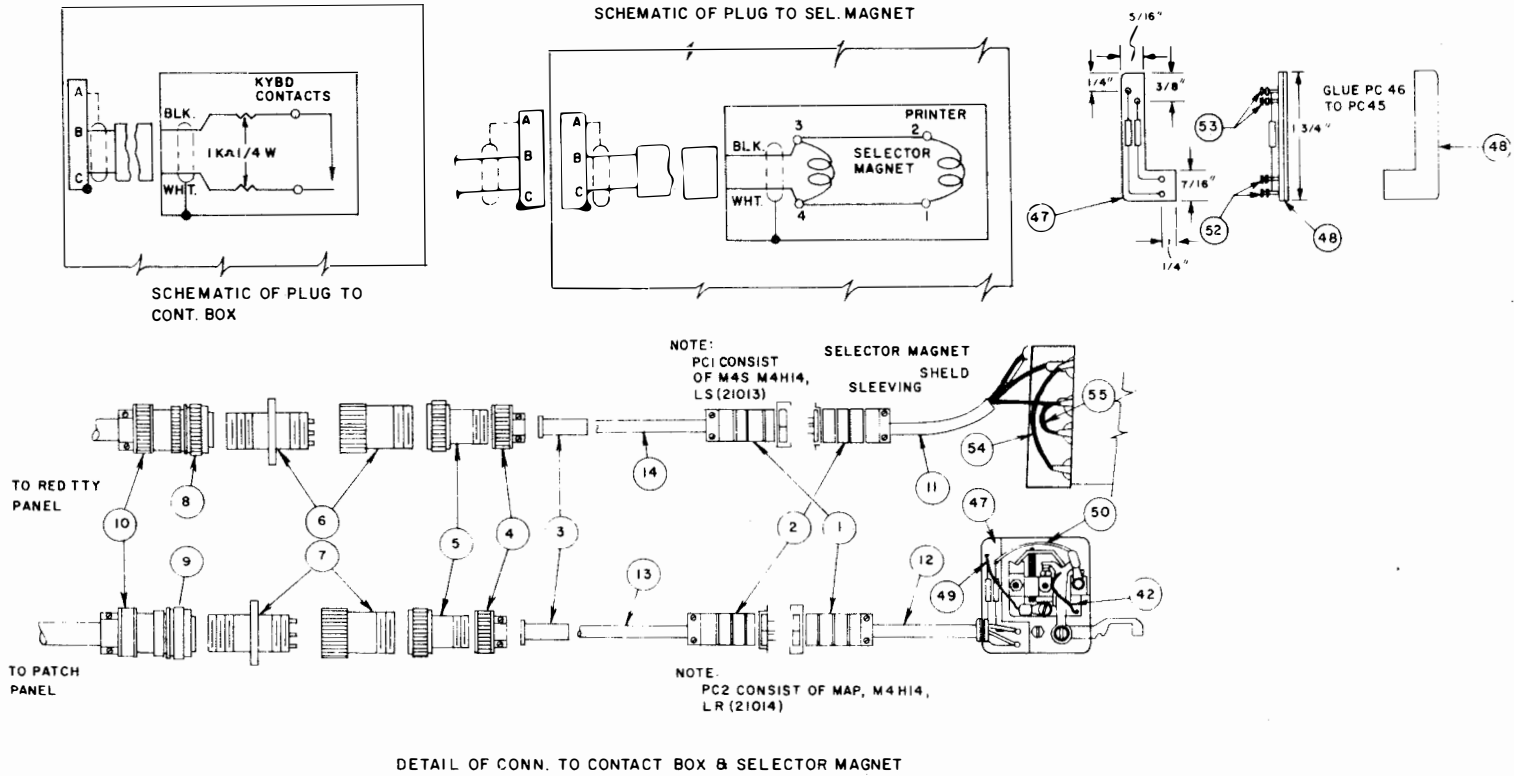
TT-176/UG Installation Drawing (Part 1)
